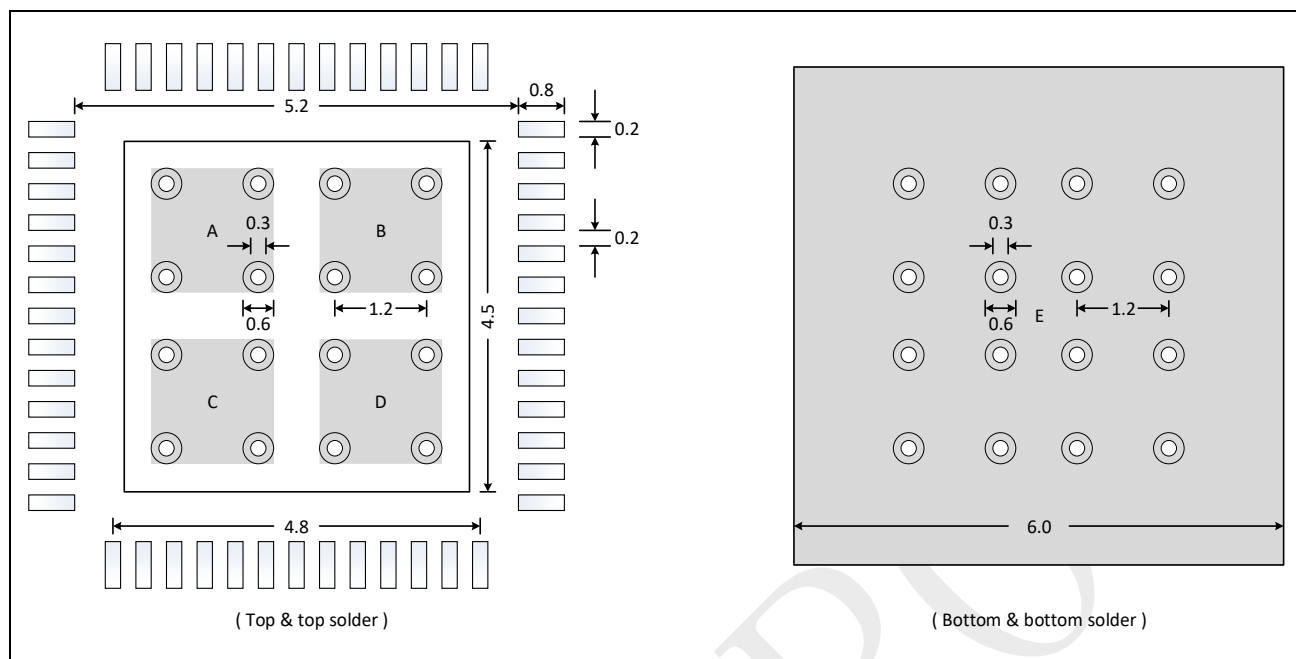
QFN52–52 pin, 6 x 6 mm quad flat no-lead package outline
